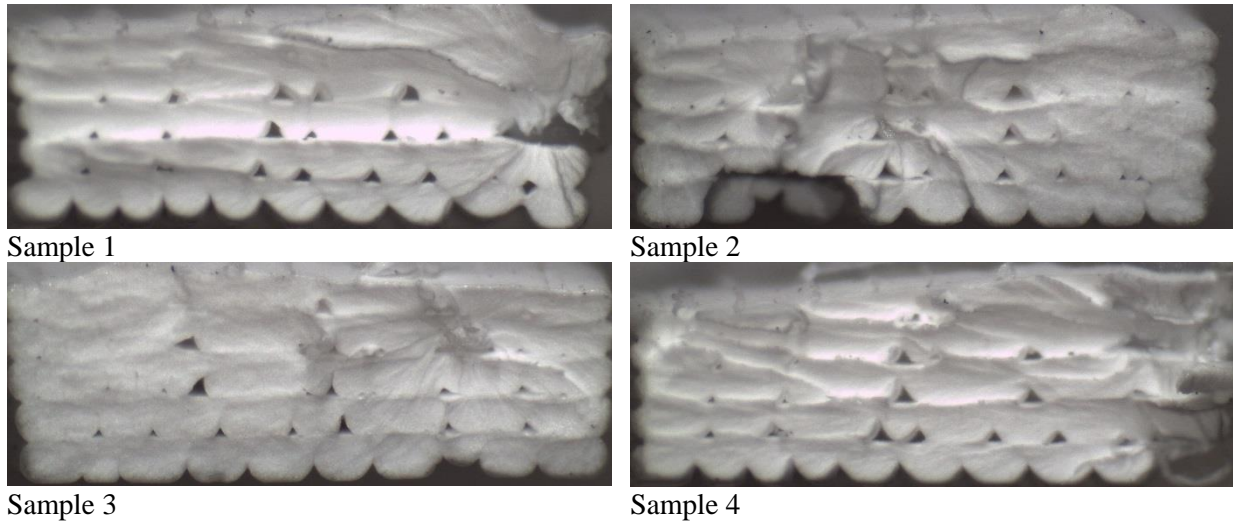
Fracture surface after tensile test for printed pure ABS samples
